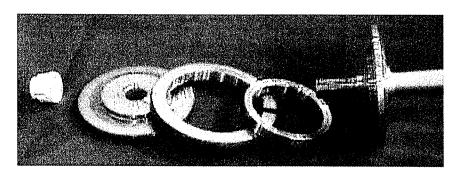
Piston Assembly Damper Rod w/Rings and Plates
